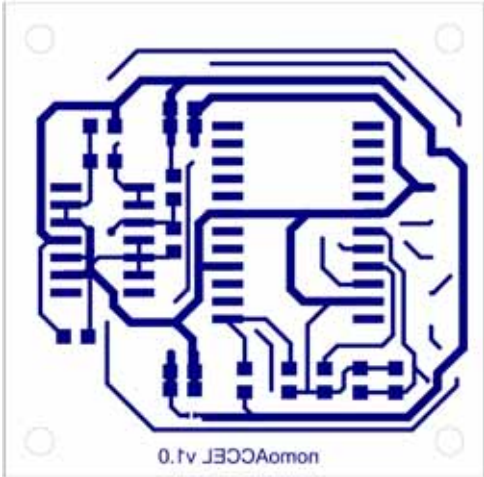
Zoomed view (200%) of the sensor board PCB bottom signal layer layout.
